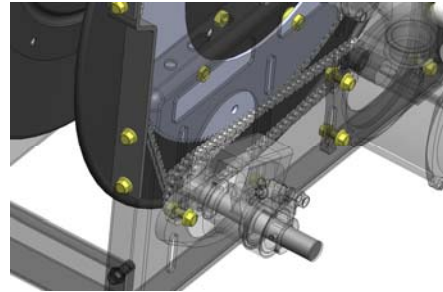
Reel with Spool & Motor Chains Attached to Reduction
